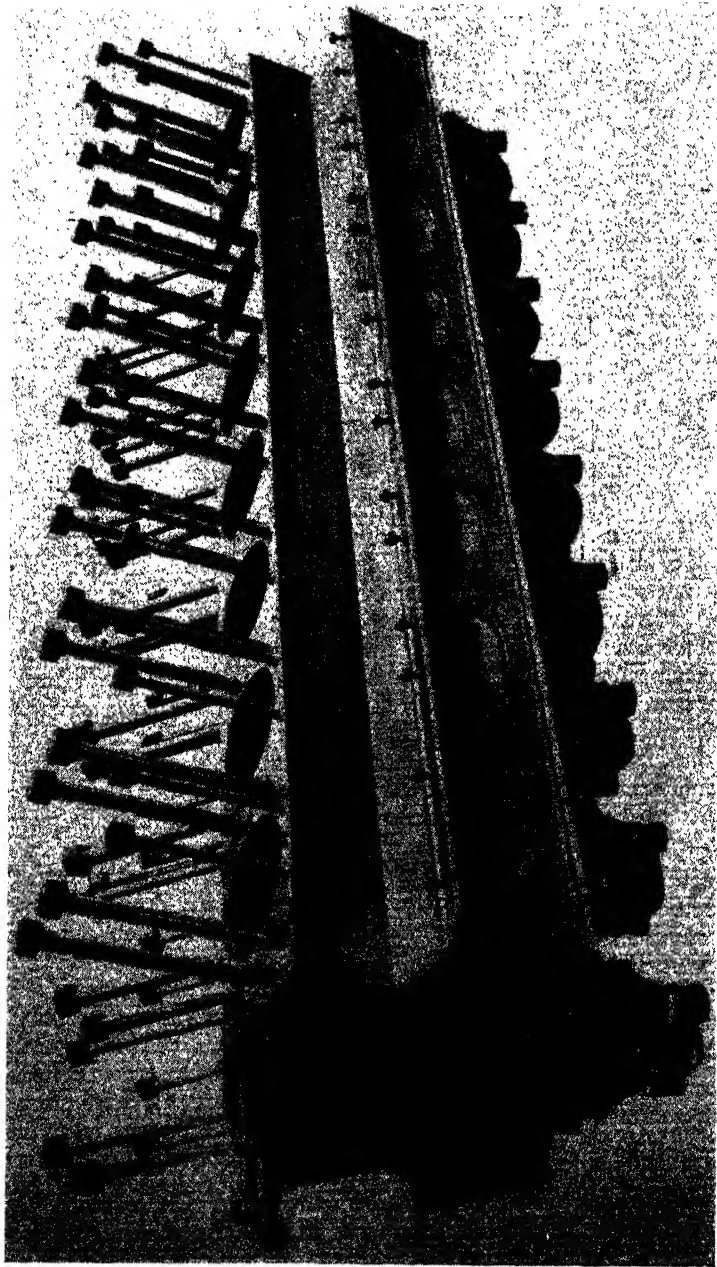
ALCO CYLINDER BLOCK WITH CRANKSHAFT BEARINGS AND CYLINDER-HEAD STUDS.
